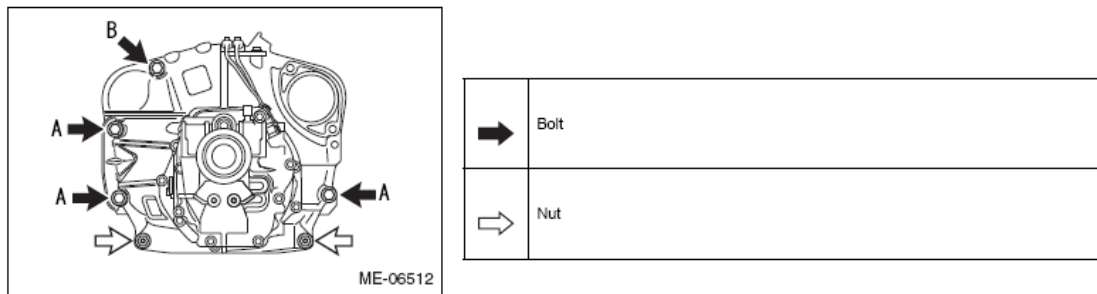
Identifying Manual Transmission Assembly Mounting Bolts And Nuts
